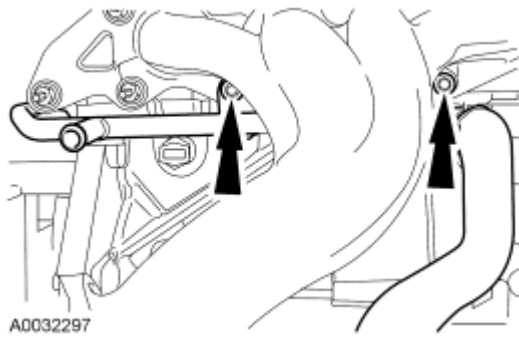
Locating Bolts & RH Engine Mount Bracket
